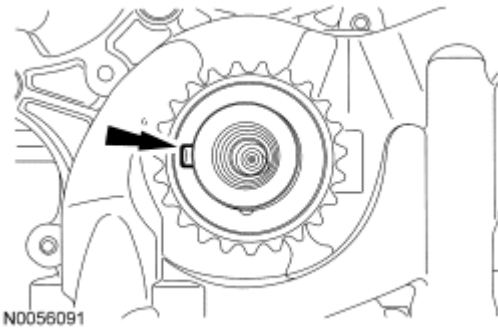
Rotating Crankshaft Counterclockwise Until Crankshaft Dowel Pin Is In 9 O'clock Position
